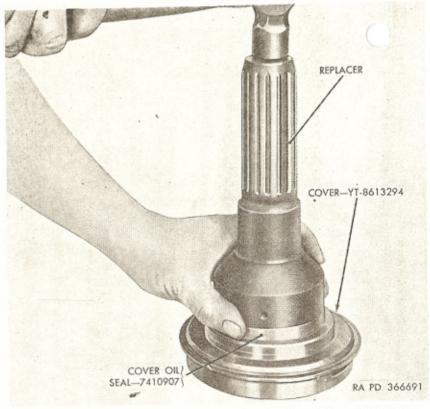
Installing front oil pump oil seal using replacer-C7950561.
